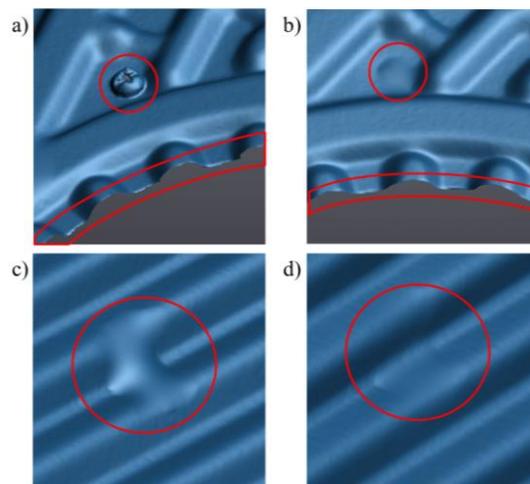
Treatment of the mesh obtained by scanning the plate: (a) a screw mark and non-uniform edge; (b) the screw mark removed and the edge smoothed; (c) a target mark on the corrugated section; and (d) the target mark removed.
